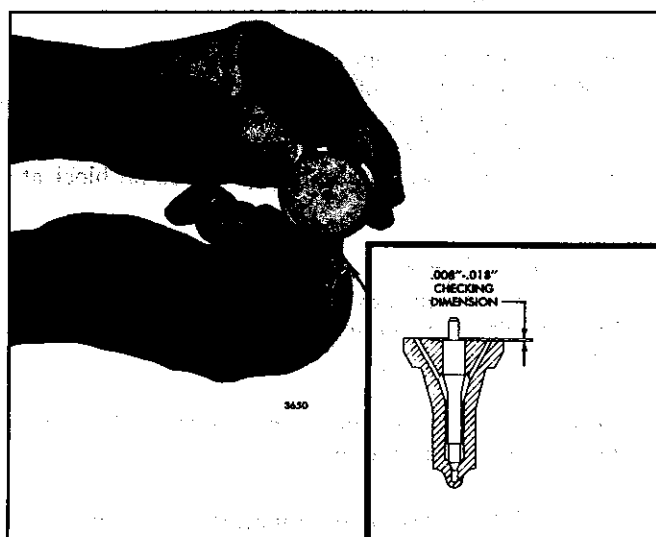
Checking Needle Valve Lift with Tool J 9462-02
